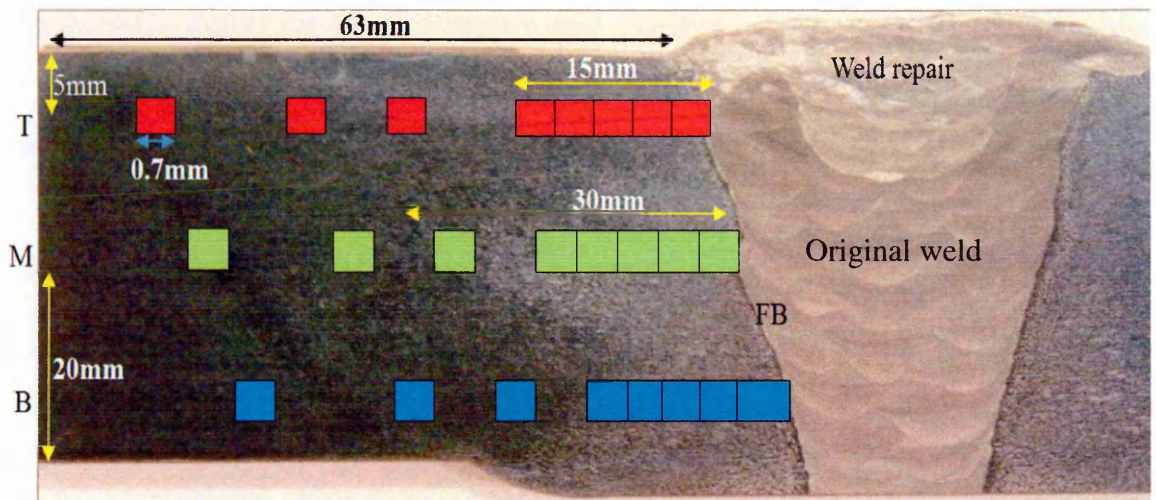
Macrograph of an ex-service Type 316H stainless steel weldment (Weld-2) showing the through thickness cross-section, EBSD measurement areas (shaded zones) and weld repair at the top section.
